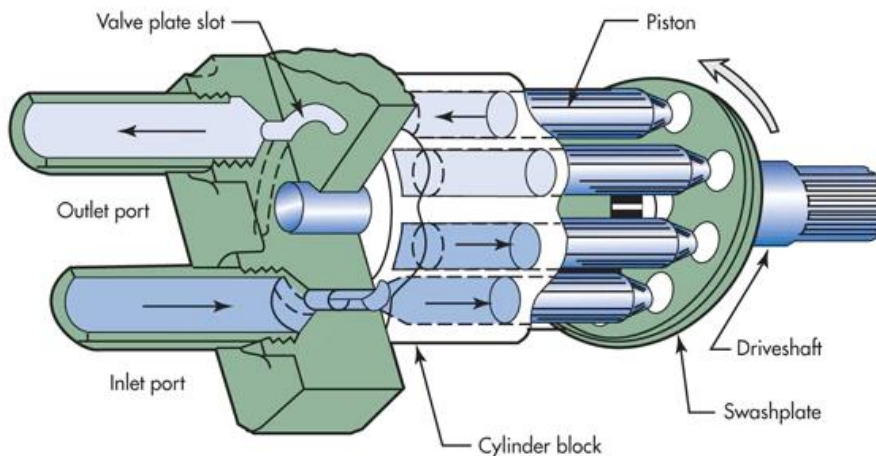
Axial piston motor (Hydraulics & Pneumatics, 2014).
